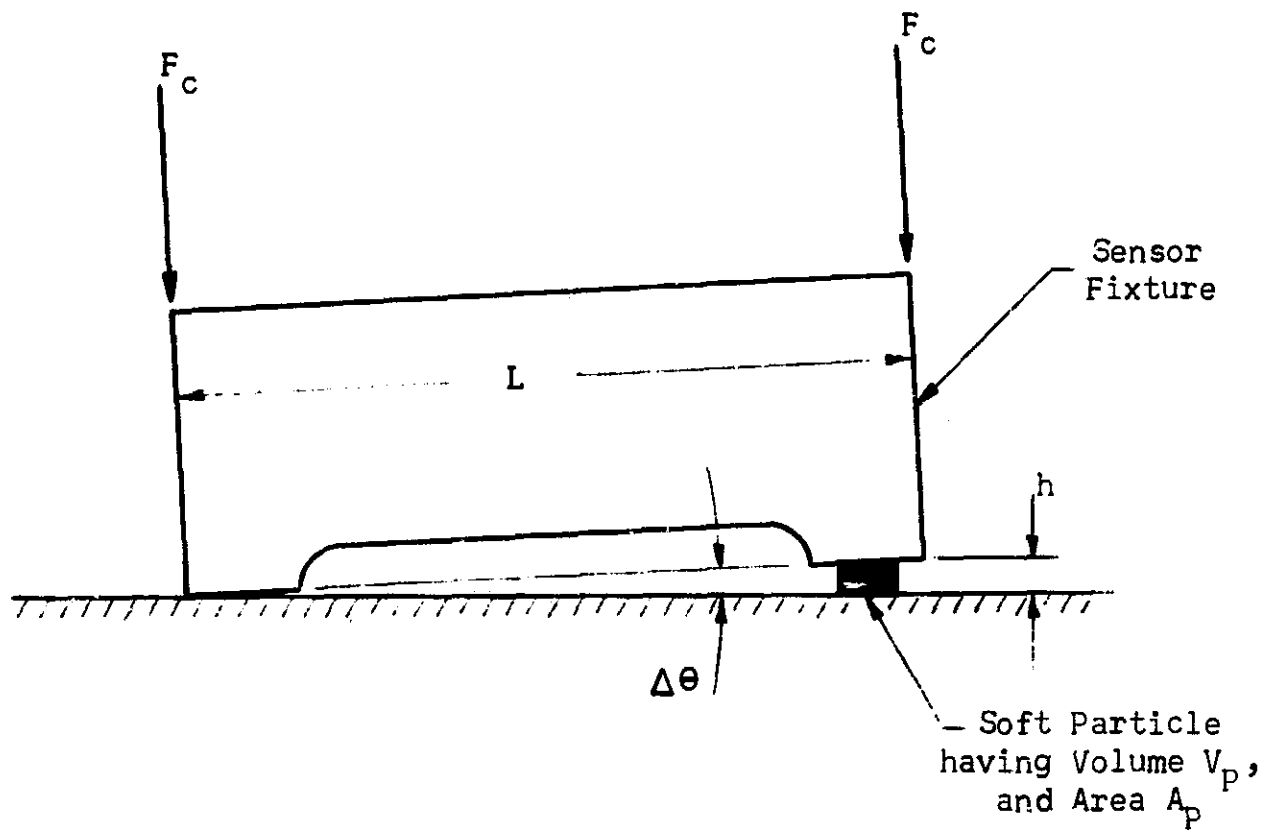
Soft Particle Trapped Between Rigid Flat Surfaces of Sensor Clamp and Mounting Block
